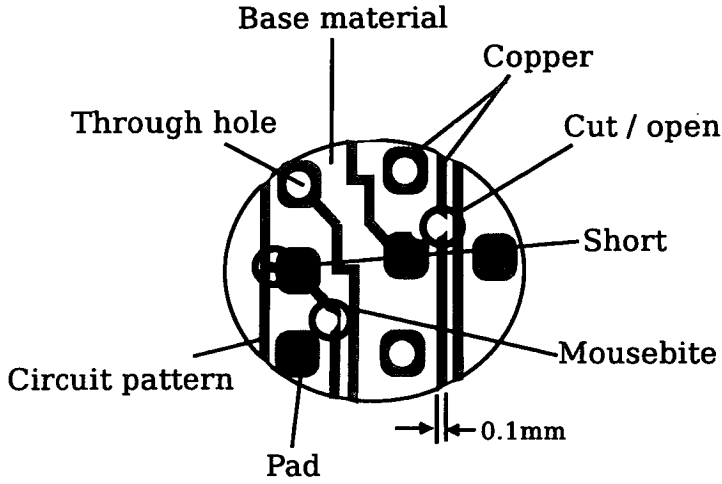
Magnified image of PCB pattern and defects
